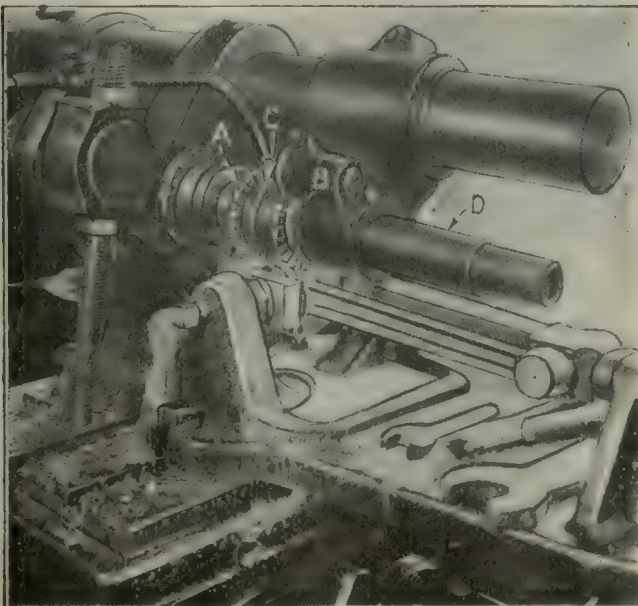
MILLING BOLT BOSSES AND CUTTING OFF CAPS
